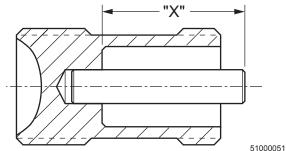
PCOR/PC Adjusting Screw Stop Pin
